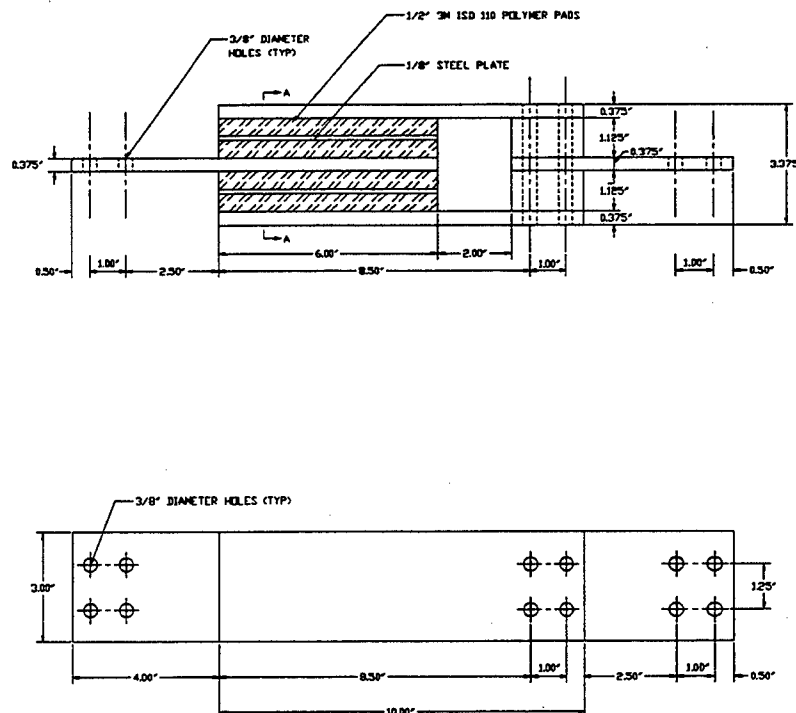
Elevation and Plan Views of Typical Viscoelastic Damper
